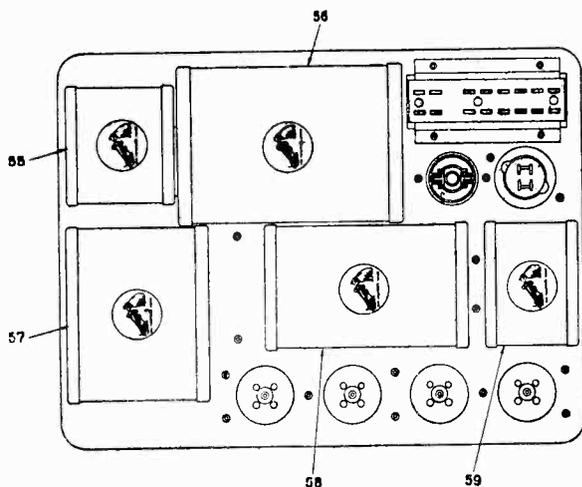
Top View of Power Amplifier Unit, Showing Parts
